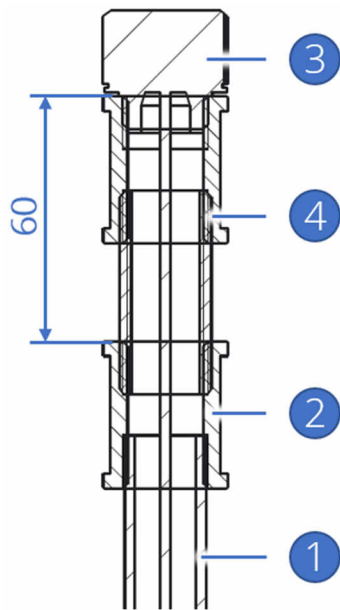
mechanical oil dipstick – installation angle 32,7°
